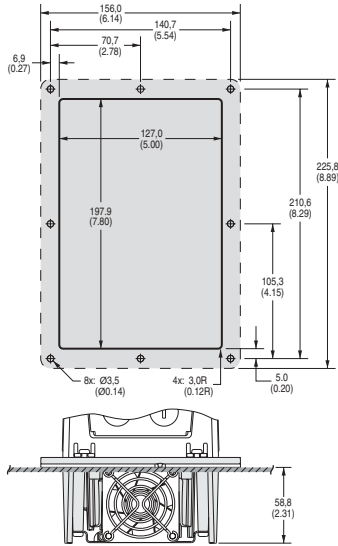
PowerFlex 70 Flange Mount Bottom View Dimensions
